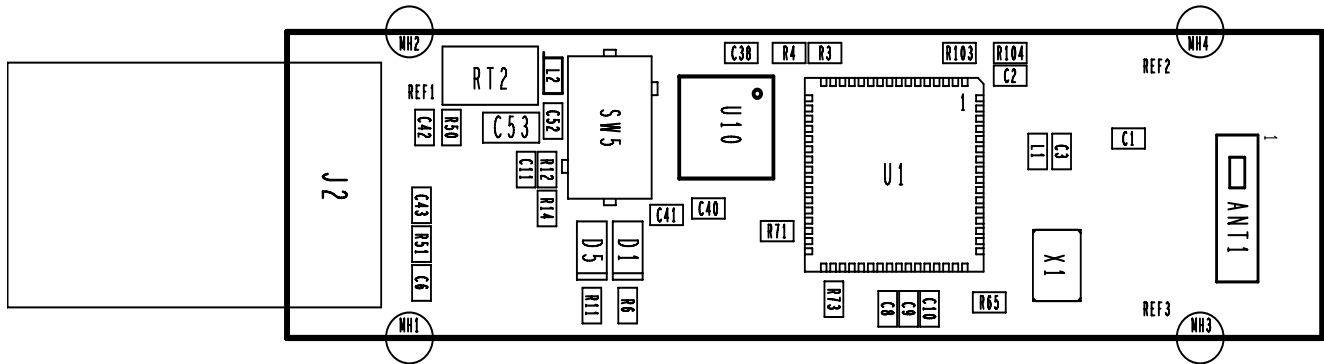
1322x USB Dongle PCB Component Location (Top View)
